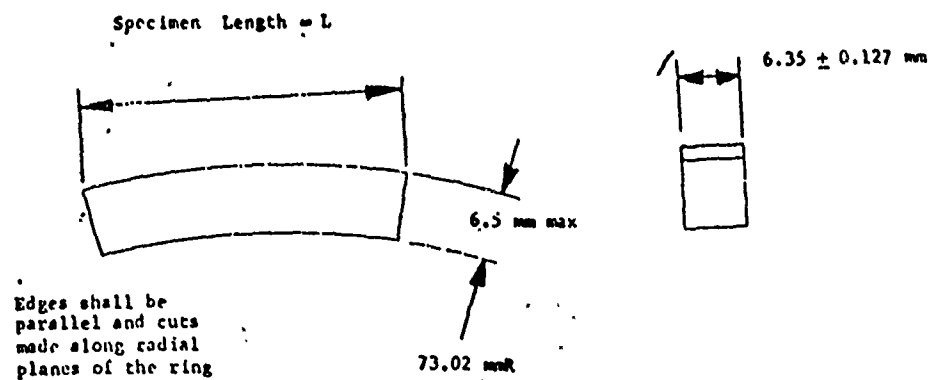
Horizontal Shear Test Specimen (Ring Specimen).
